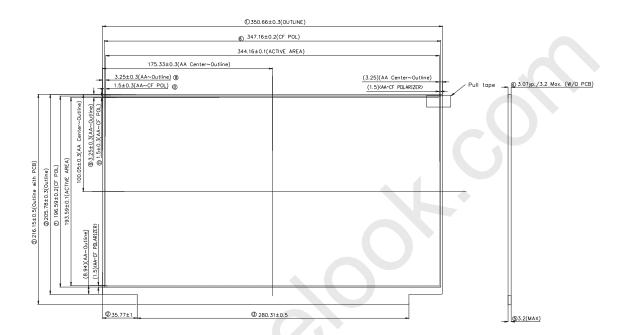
TFT-LCD Module Outline Dimension (Front View)
